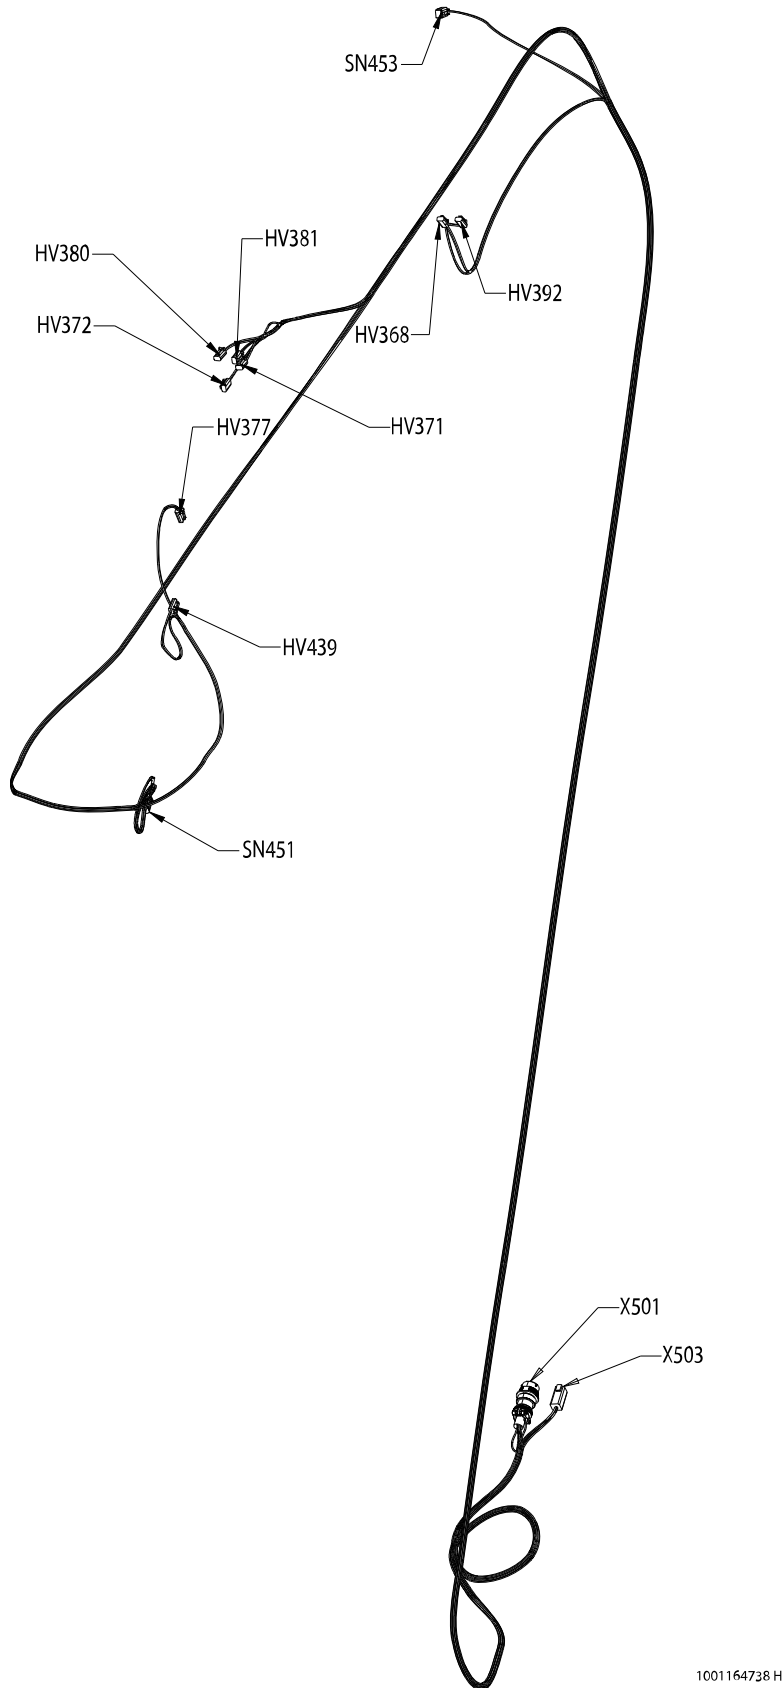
Tower Upright Valve Harness - Sheet 4 of 4
